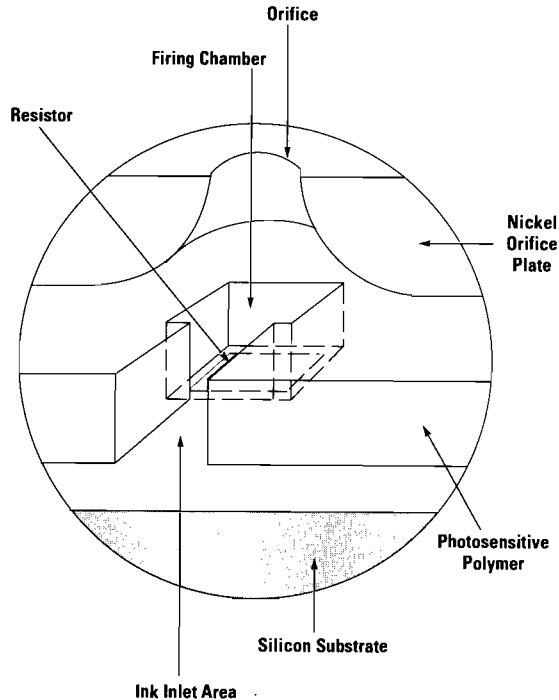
An exploded cross-sectional view of a single inkjet nozzle.
